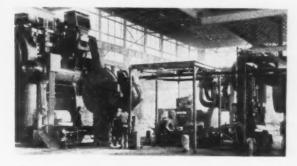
A 6000-ton Ajax press, largest in the auto industry, is used for press forging. A 2-die setup is employed.
